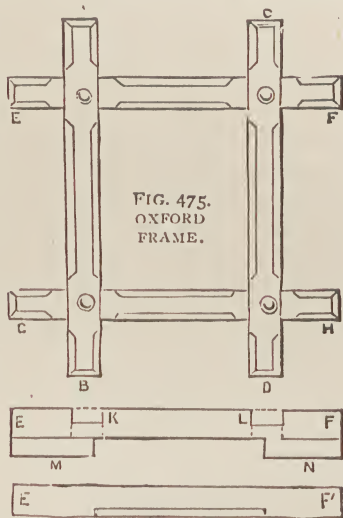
ELEVATION OF TRANSVERSE BARS.
